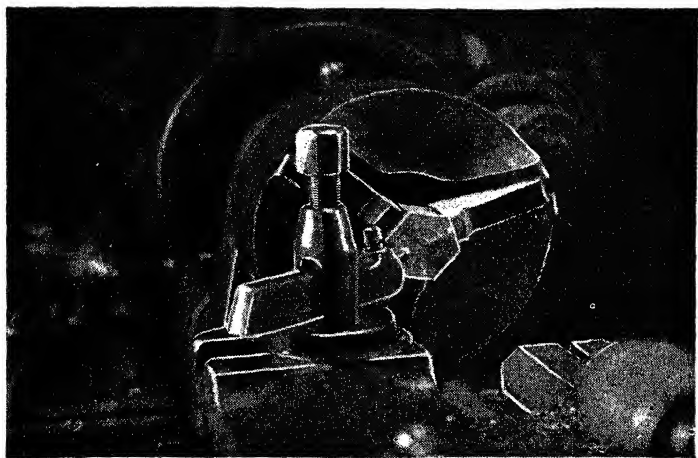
Showing the tool holder adjusted too flat in relation to the facing cut.
